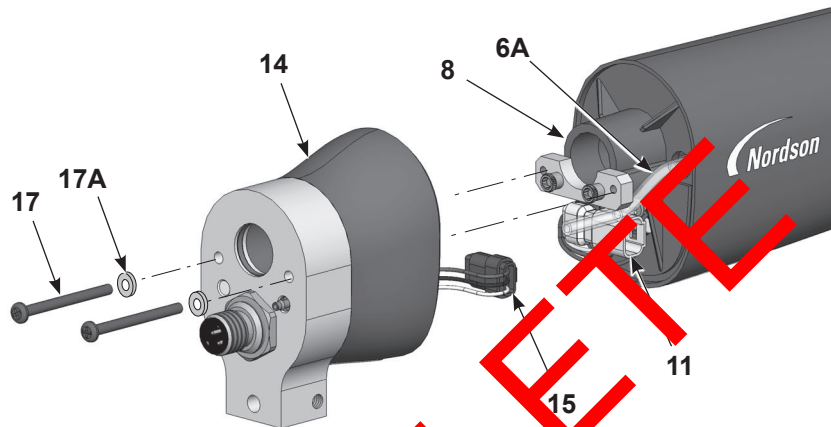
Bar-Mount Gun Disassembly 1 of 3
